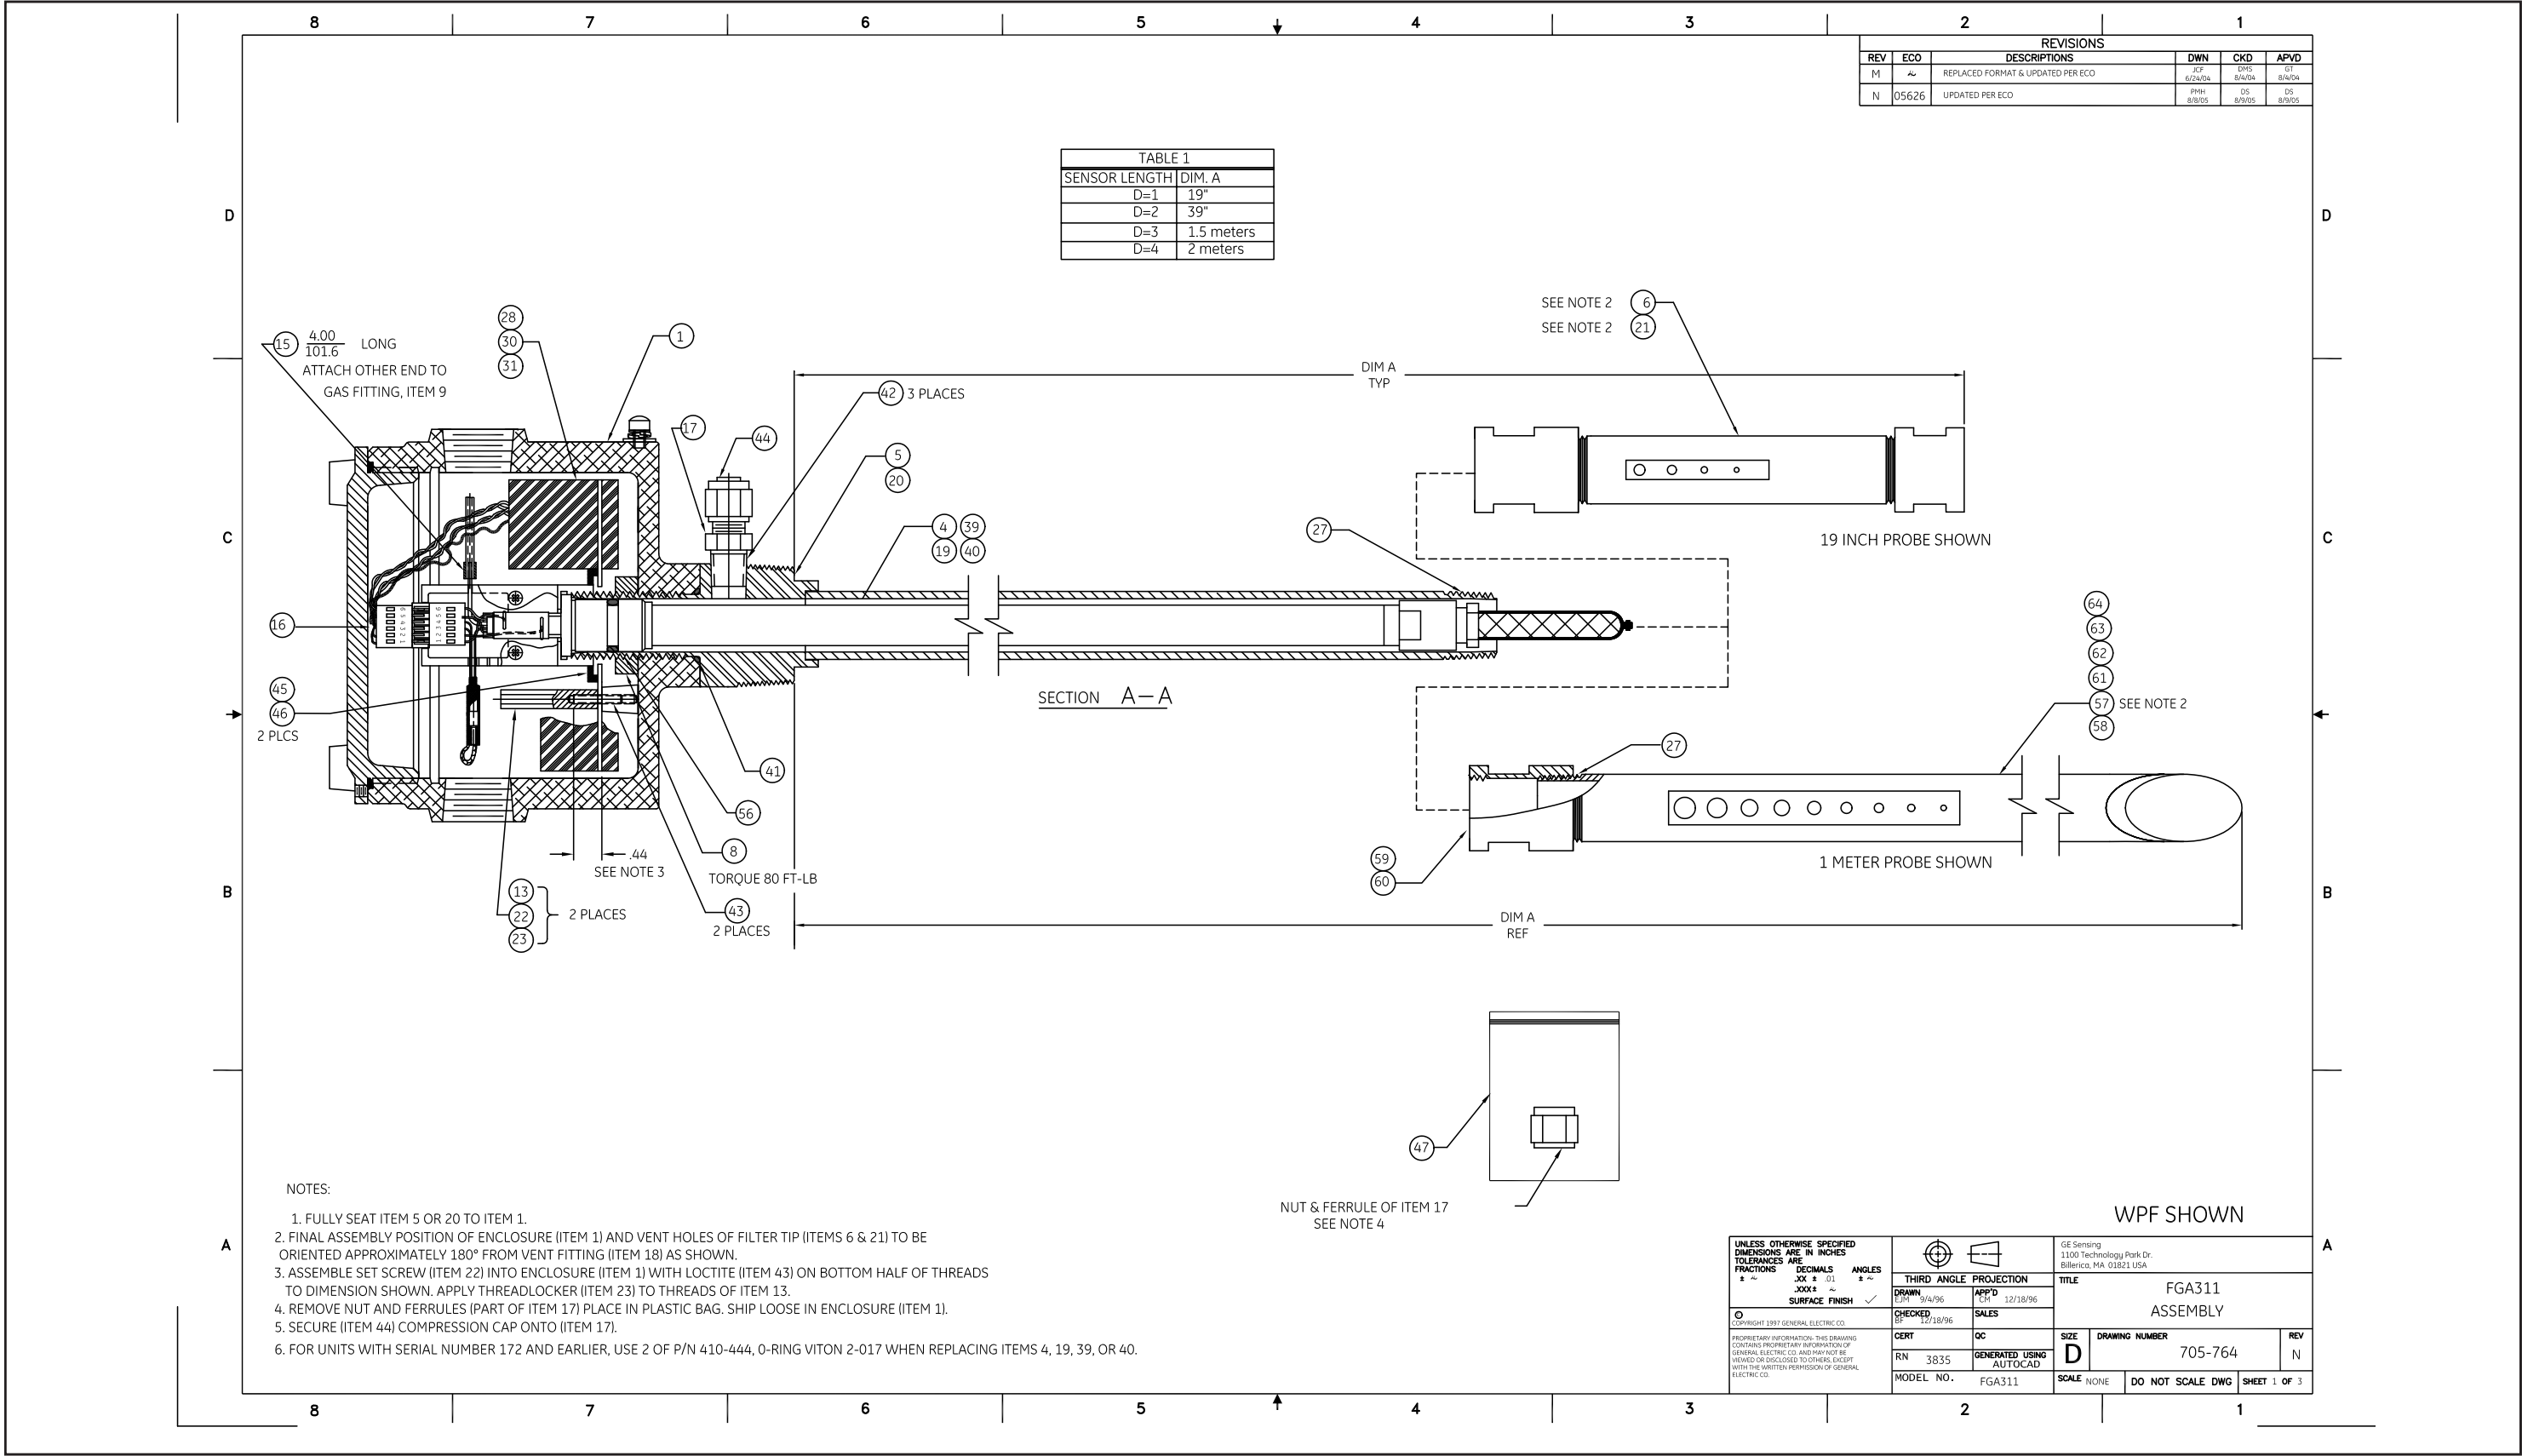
FGA 311 Weatherproof Assembly (Drawing 705-764_rev N, Sheet 1)
